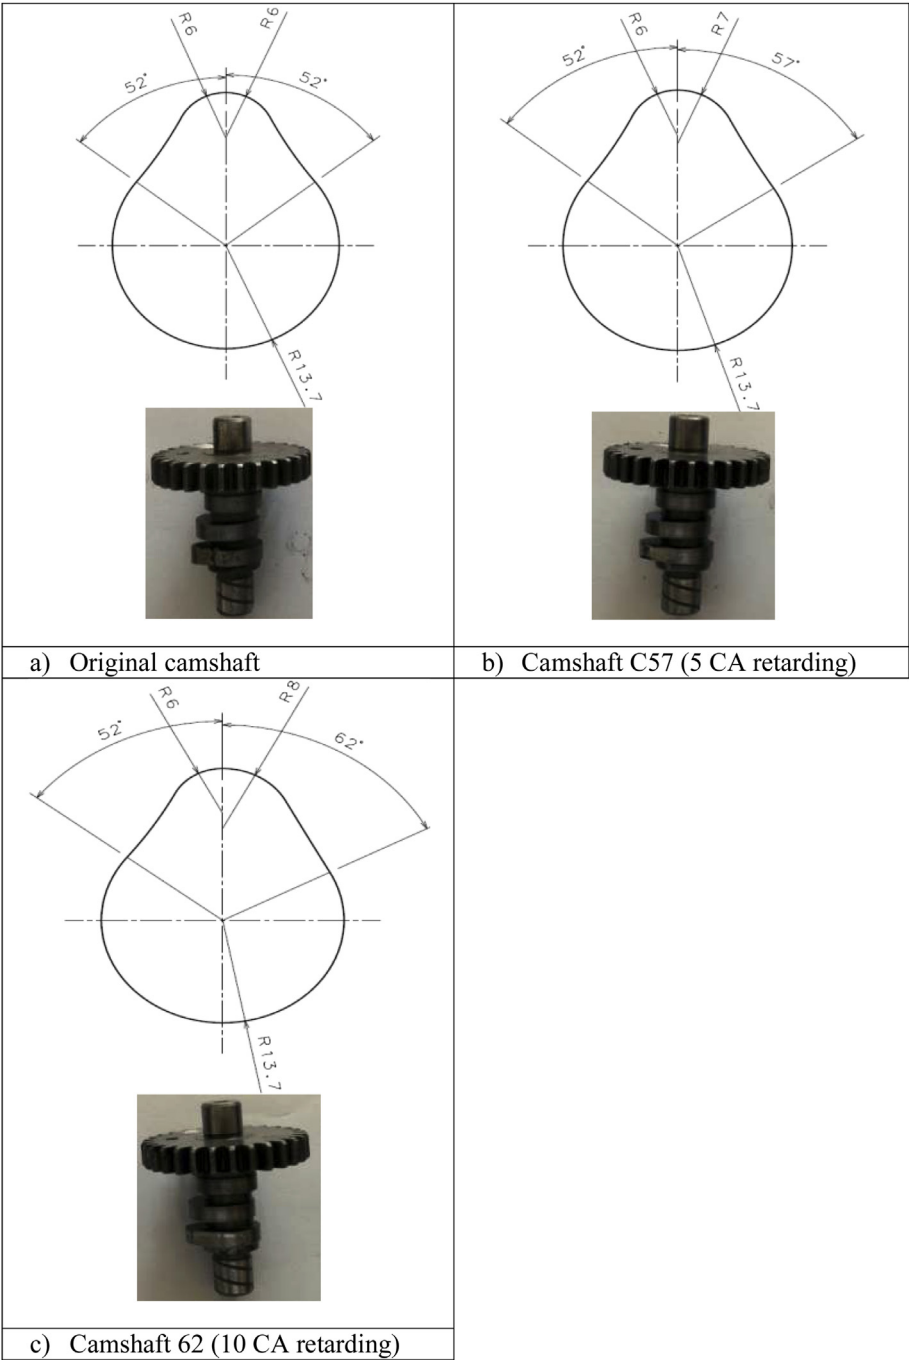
The picture and technical drawings of the original and modified camshafts in accordance with the Miller cycle.
